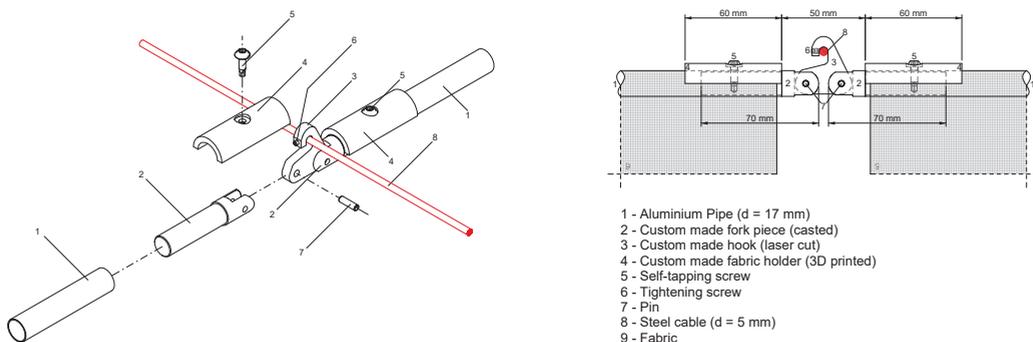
The structural detail drawings of the fabric, pipe, and cable connections.
